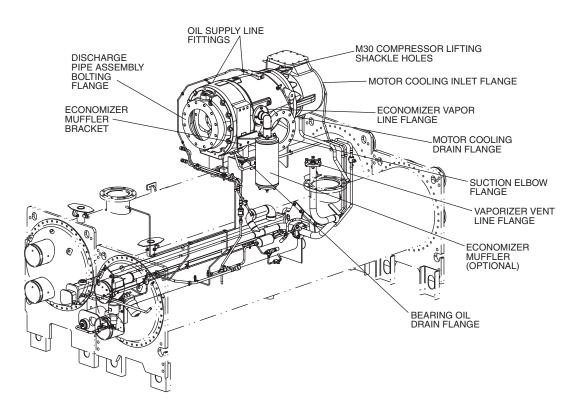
Compressor Removal, Q and R Compressors (Unit with R Compressor Shown)
